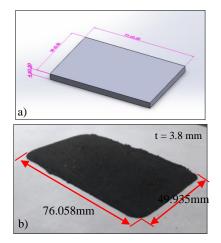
Rectangular Shape, a) Solidworks Drawing, b) Printed Part
